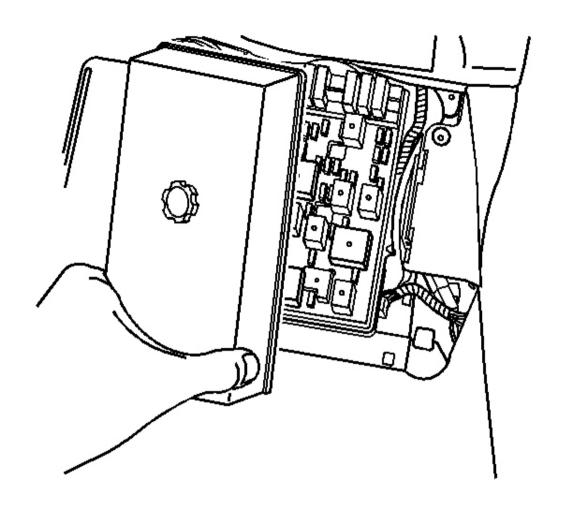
Cover To IP Electrical Center Courtesy of GENERAL MOTORS CORP.
